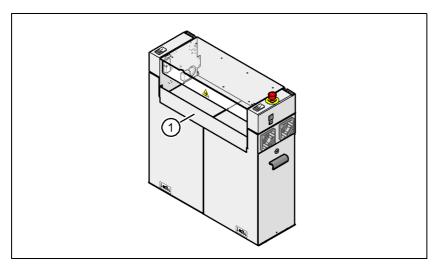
11 Fitting the "bottom" hand guard on the PCB output side
